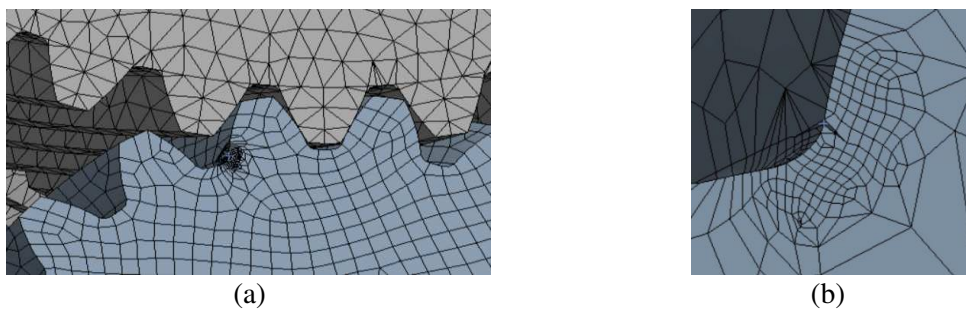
Local crack view with meshing. (a) Local model view; (b) Local crack view
